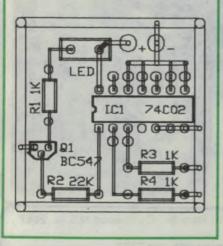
The PCB pattern he produced using Easytrax, printed out on a dot-matrix printer (75% of full size).
